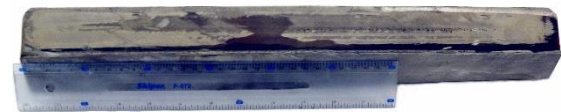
Side B of the inspected gear tooth, length 450 mm
